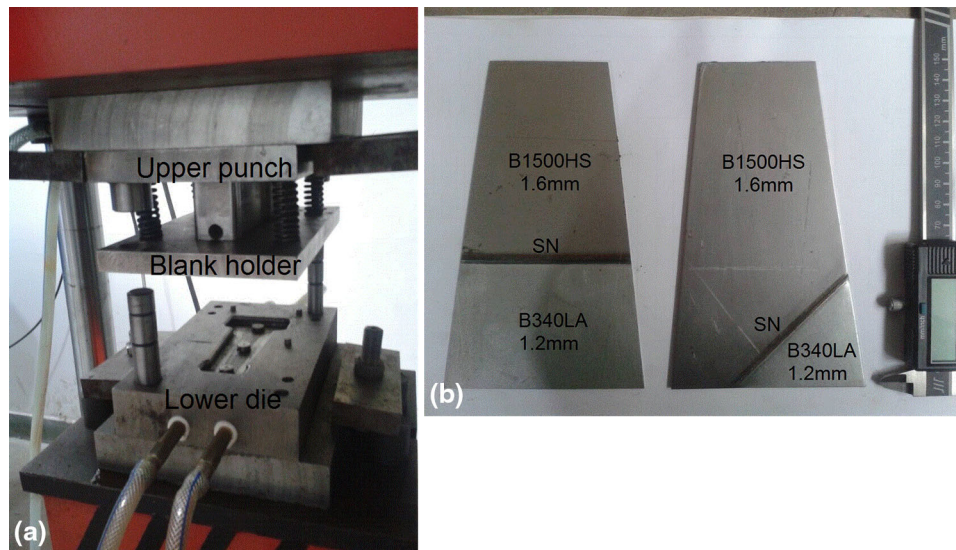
Experimental apparatus and initial flat blanks: (a) die set and (b) initial flat blanks
